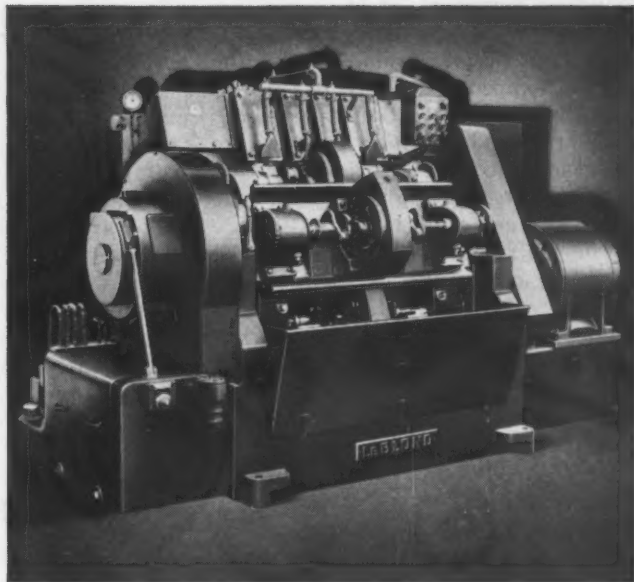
Four-station Revolving-drum Crankshaft Lathe for Finish-turning Line Bearings
